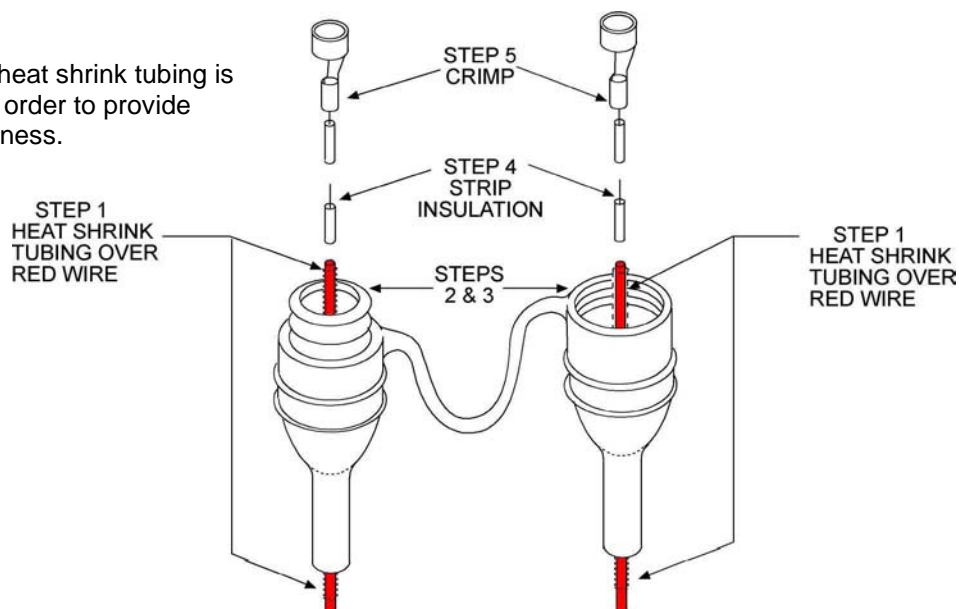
Proper assembly of Fuse Holder Kit (40688G-47)
